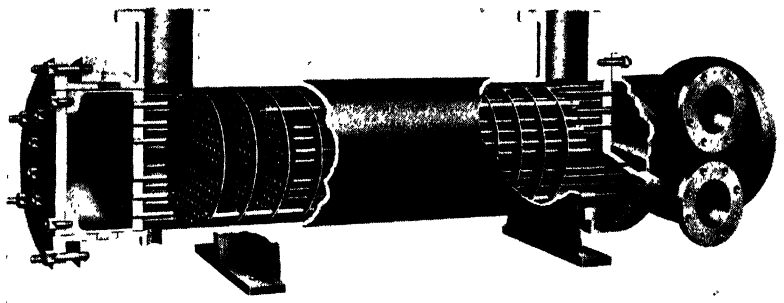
Cutaway view of a shell-and-tube heat exchanger equipped with orifice-type baffles and a packed floating head. (Courtesy of the Griscom-Russell Co.)
